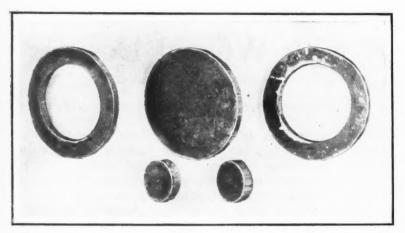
Parts for Welded Steel Pinion Cut Out from Flat Rolled Steel
